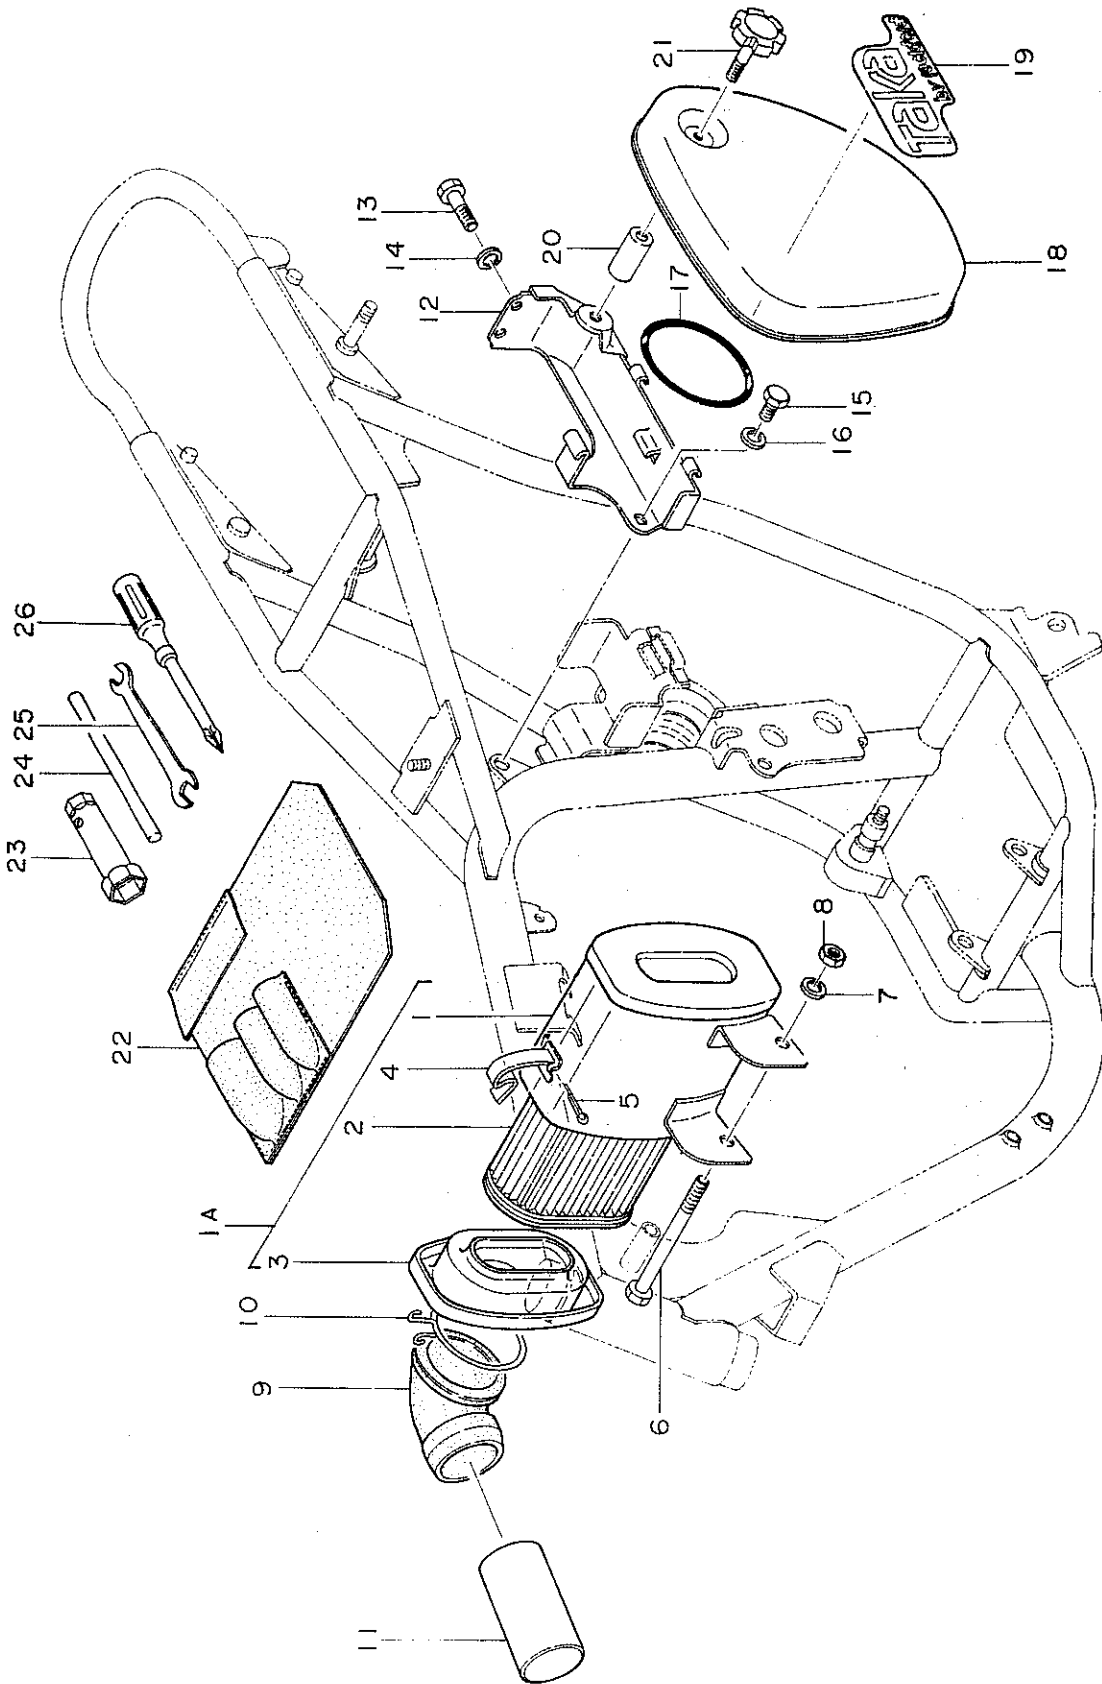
AIR CLEANER - SIDE COVER - TOOLS
